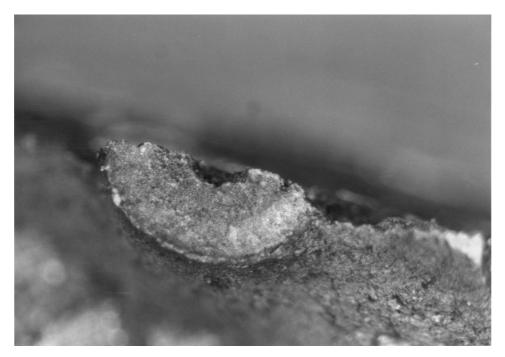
Fatigue failure initiating at a corrosion pit.
